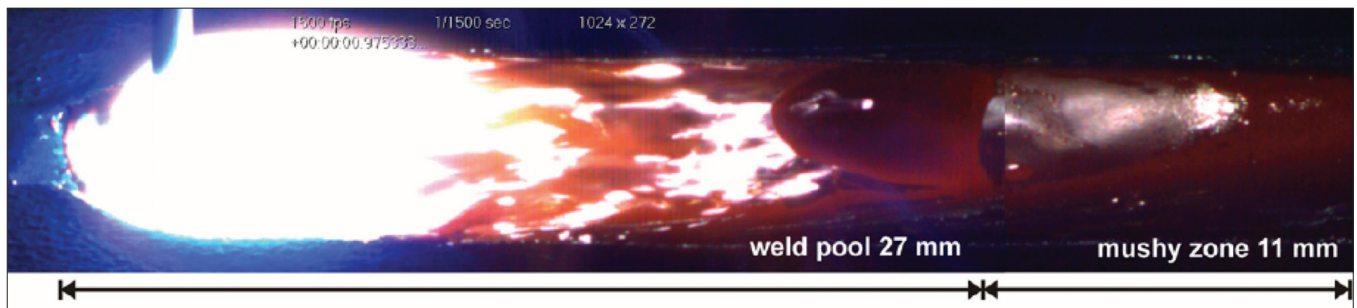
Experimental image of weld pool during welding, total weld pool length is approx. 38 mm, GMAW, net heat input = 1 kJ/mm [31]
